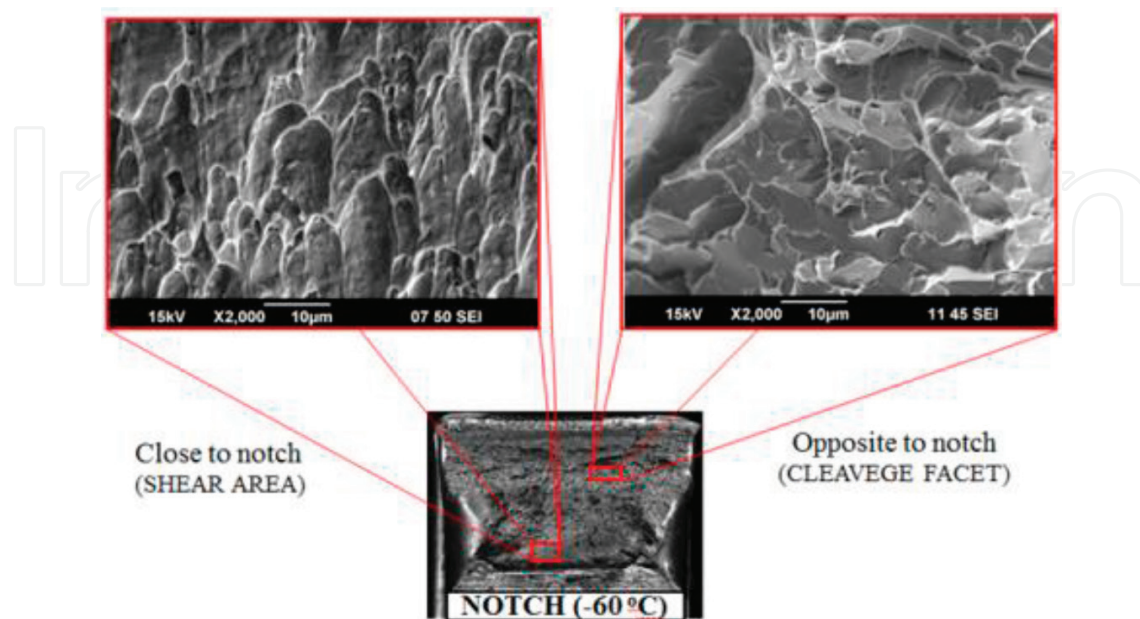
Fracture surface for 10-mm thick CVN specimen tested at -60°C .
